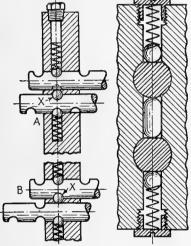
Fig. 80. Figs. 79 and 80.—A double-locking device for gear-shift yoke rods is shown in Fig. 79. At A, the neutral position is shown with ball X free in the hole. At B, the lower rod is shifted; ball X is forced upward, the upper rod being retained in a neutral position. The lower rod must also be in neutral position before the upper rod can be moved. A similar design is shown in Fig. 80, wherein a rod with hemispherical ends is used in place of ball X.
